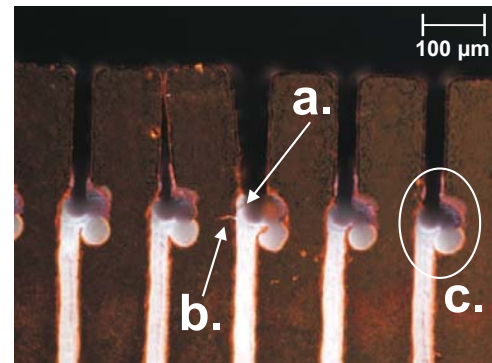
Damage caused by “flossing” in a trap used in Innsbruck [97]. The Alumina wafer was cracked (a). The gold coating is torn partly but still holding the electrode on (b). The three laser machining holes (c) at the base are a structural weakness on this particular trap.
